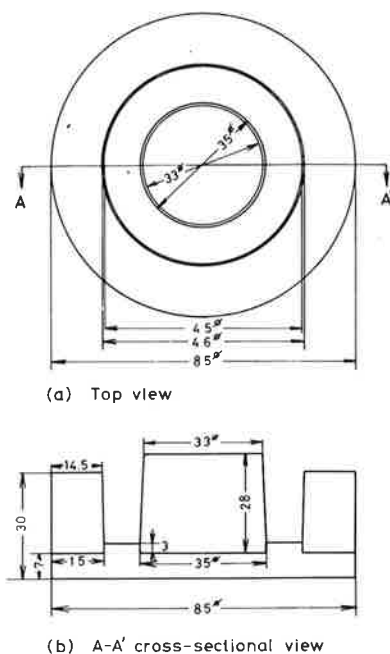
Shape and dimension of mold for ring-cast cracking test
